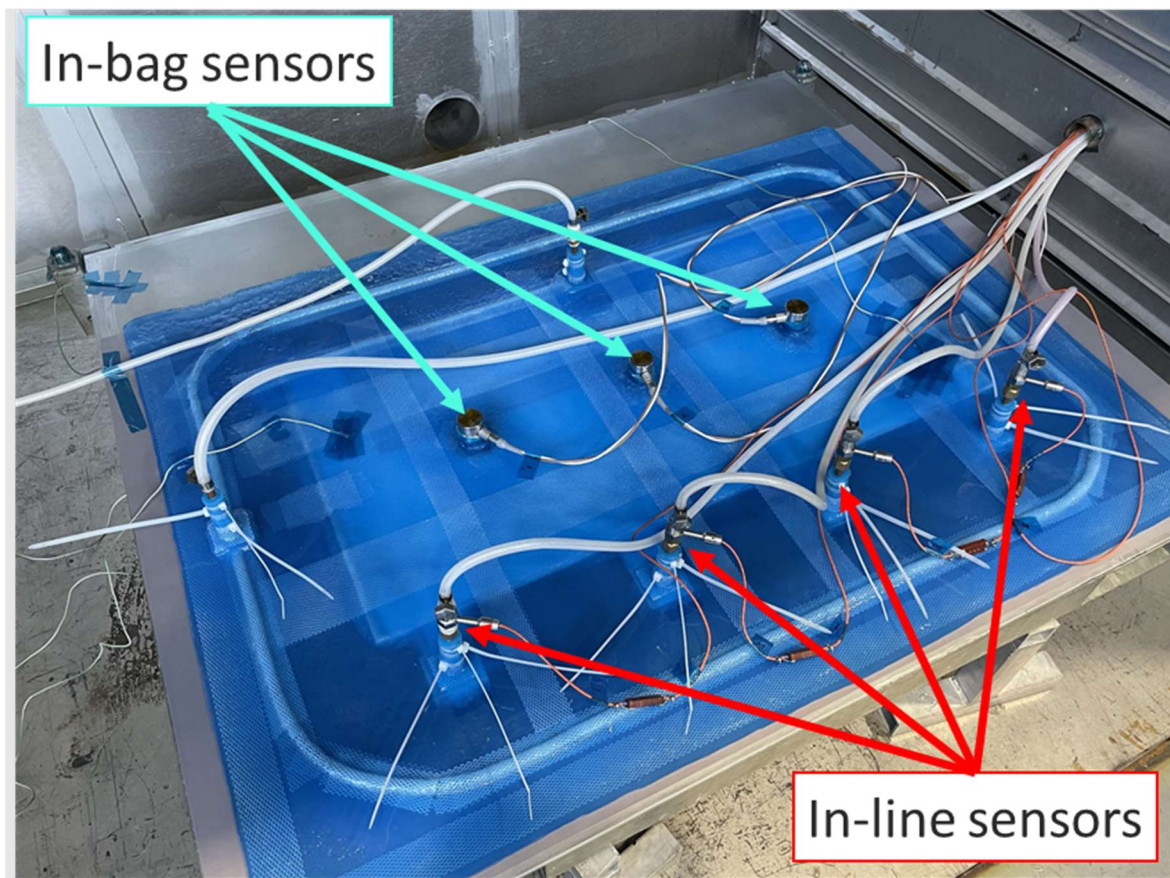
Image of Sensor Array in the LRI manufacture setup
